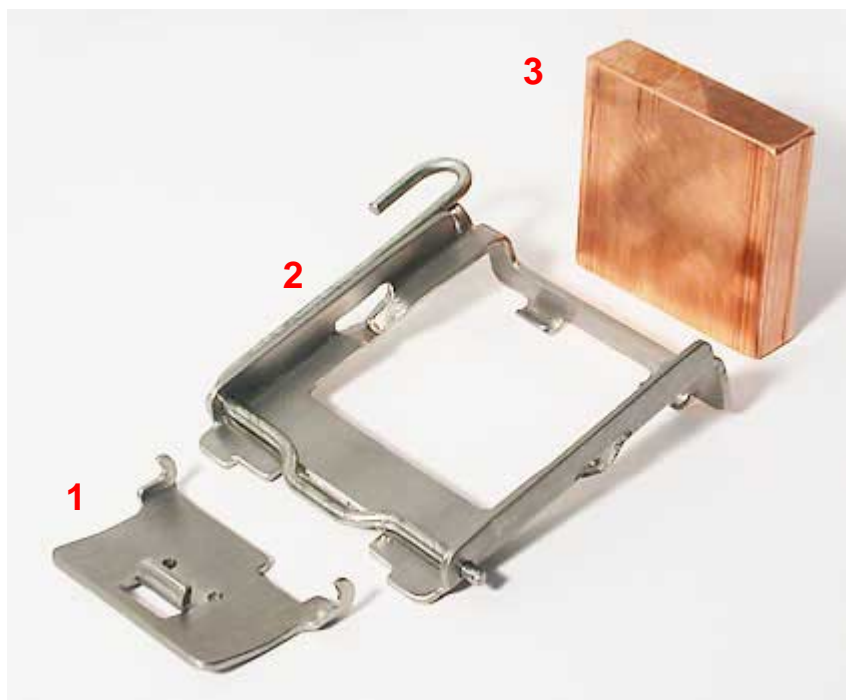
Interposer clamp, consisting of 1) End Plate, 2) Top Clamp and 3) Heat Sink Spacer
